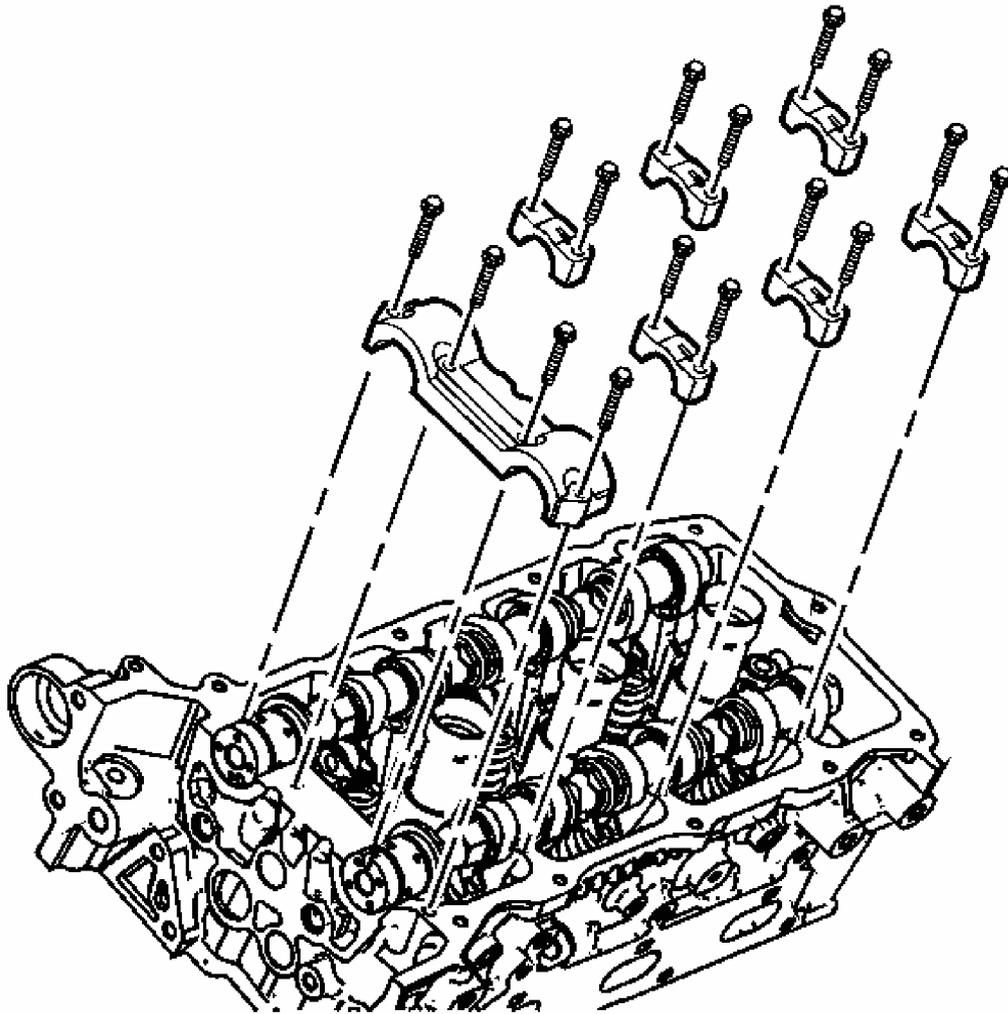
Locating Camshaft Bearing Cap & Bolts
